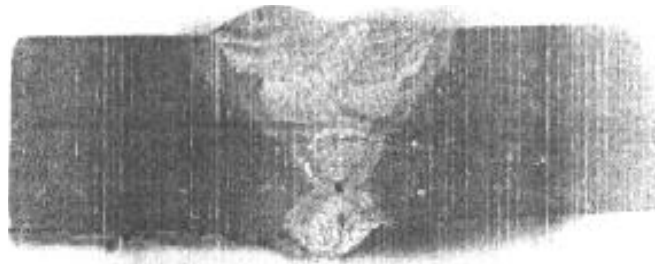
Macrograph of 10mm thick joint welded using MAG welding process and 25°C preheating.
